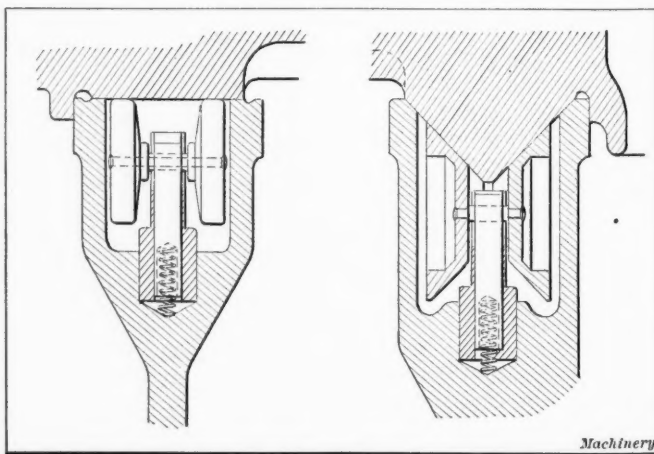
Lubricating Rollers for B. & S. Grinding Machines
